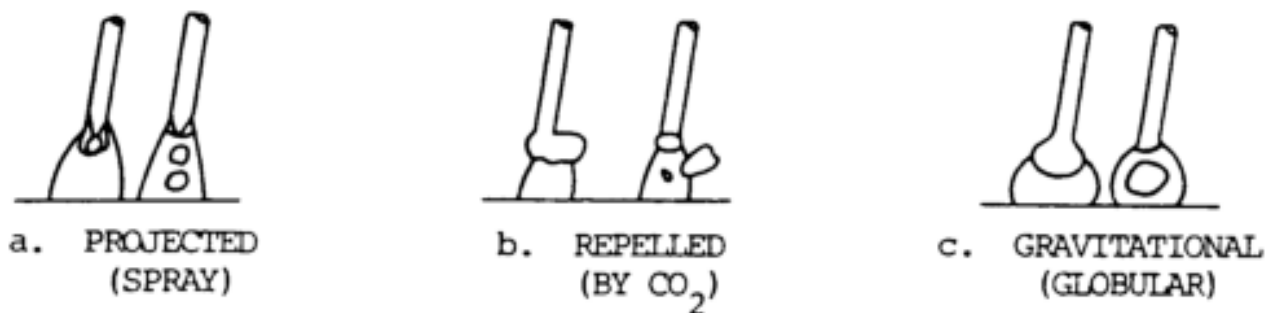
Three types of free-flight metal transfer in a welding arc.
